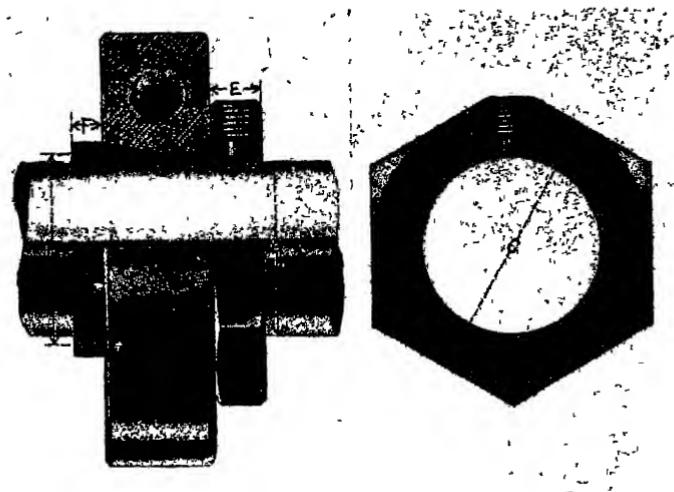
THE HOFFMANN TAPERED HOUSING FOR BALL BEARINGS
